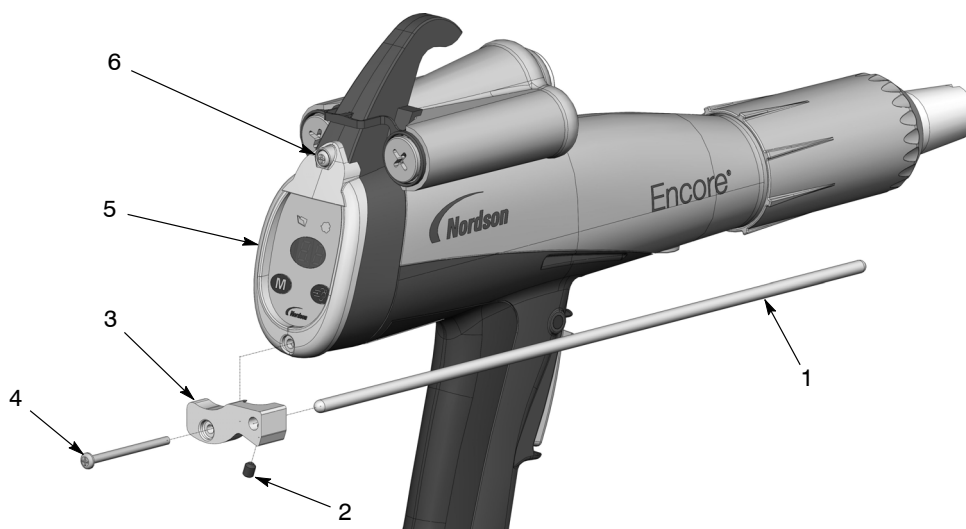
Installing the Ion Collector Kit on an Encore Spray Gun with a nLighten.
